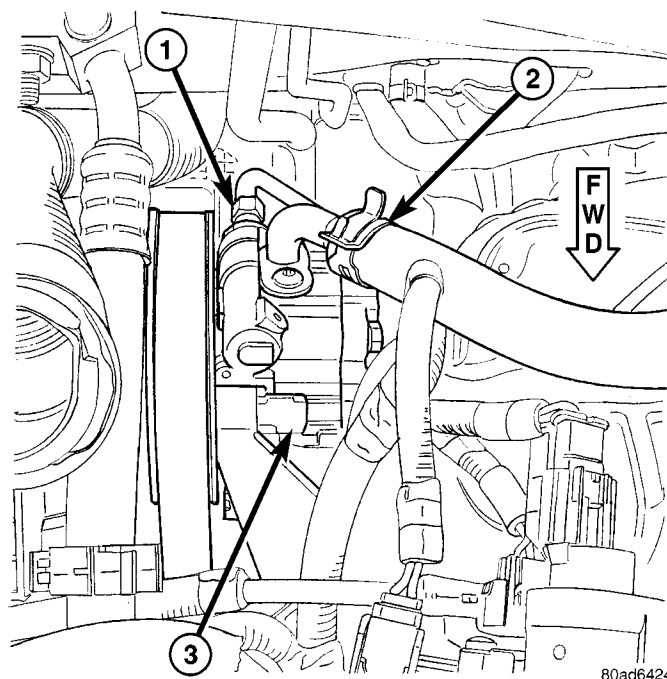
Supply & Pressure Hoses At Pump - 3.3L/3.8L Engine
